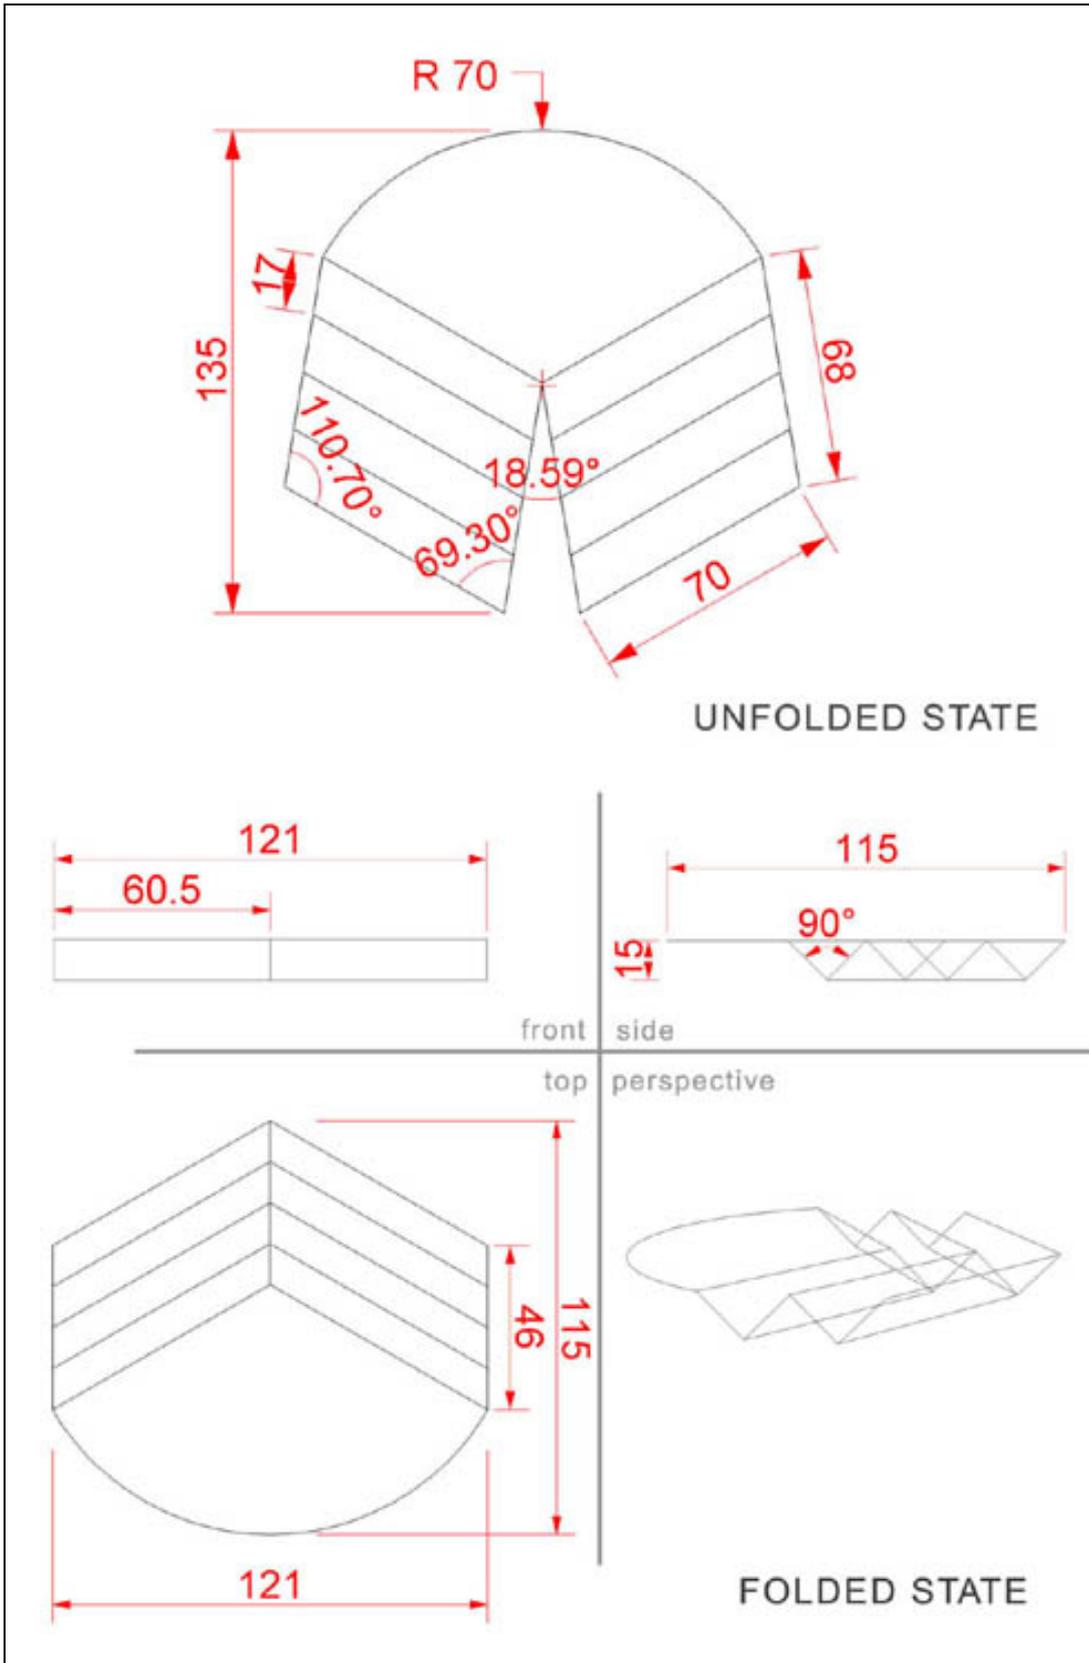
Technical Drawings Of one Leaf unit (measures: mm, scale: 1/20)
